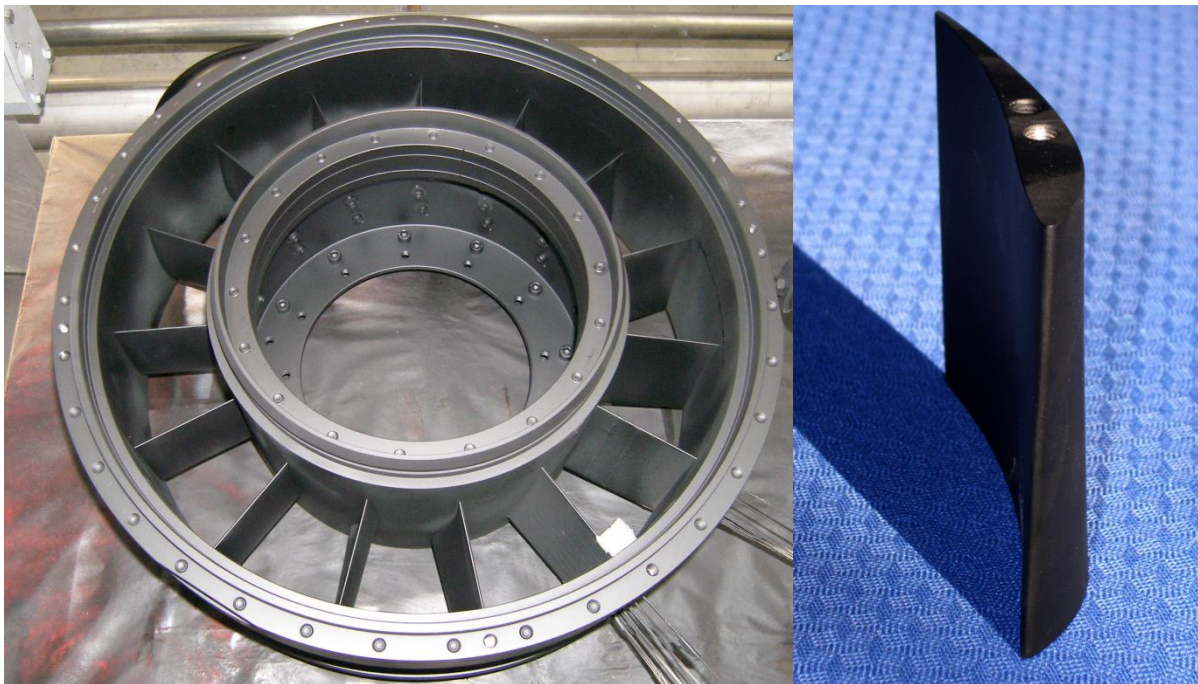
Datum EGV; Assembly (left) and single vane (right)
